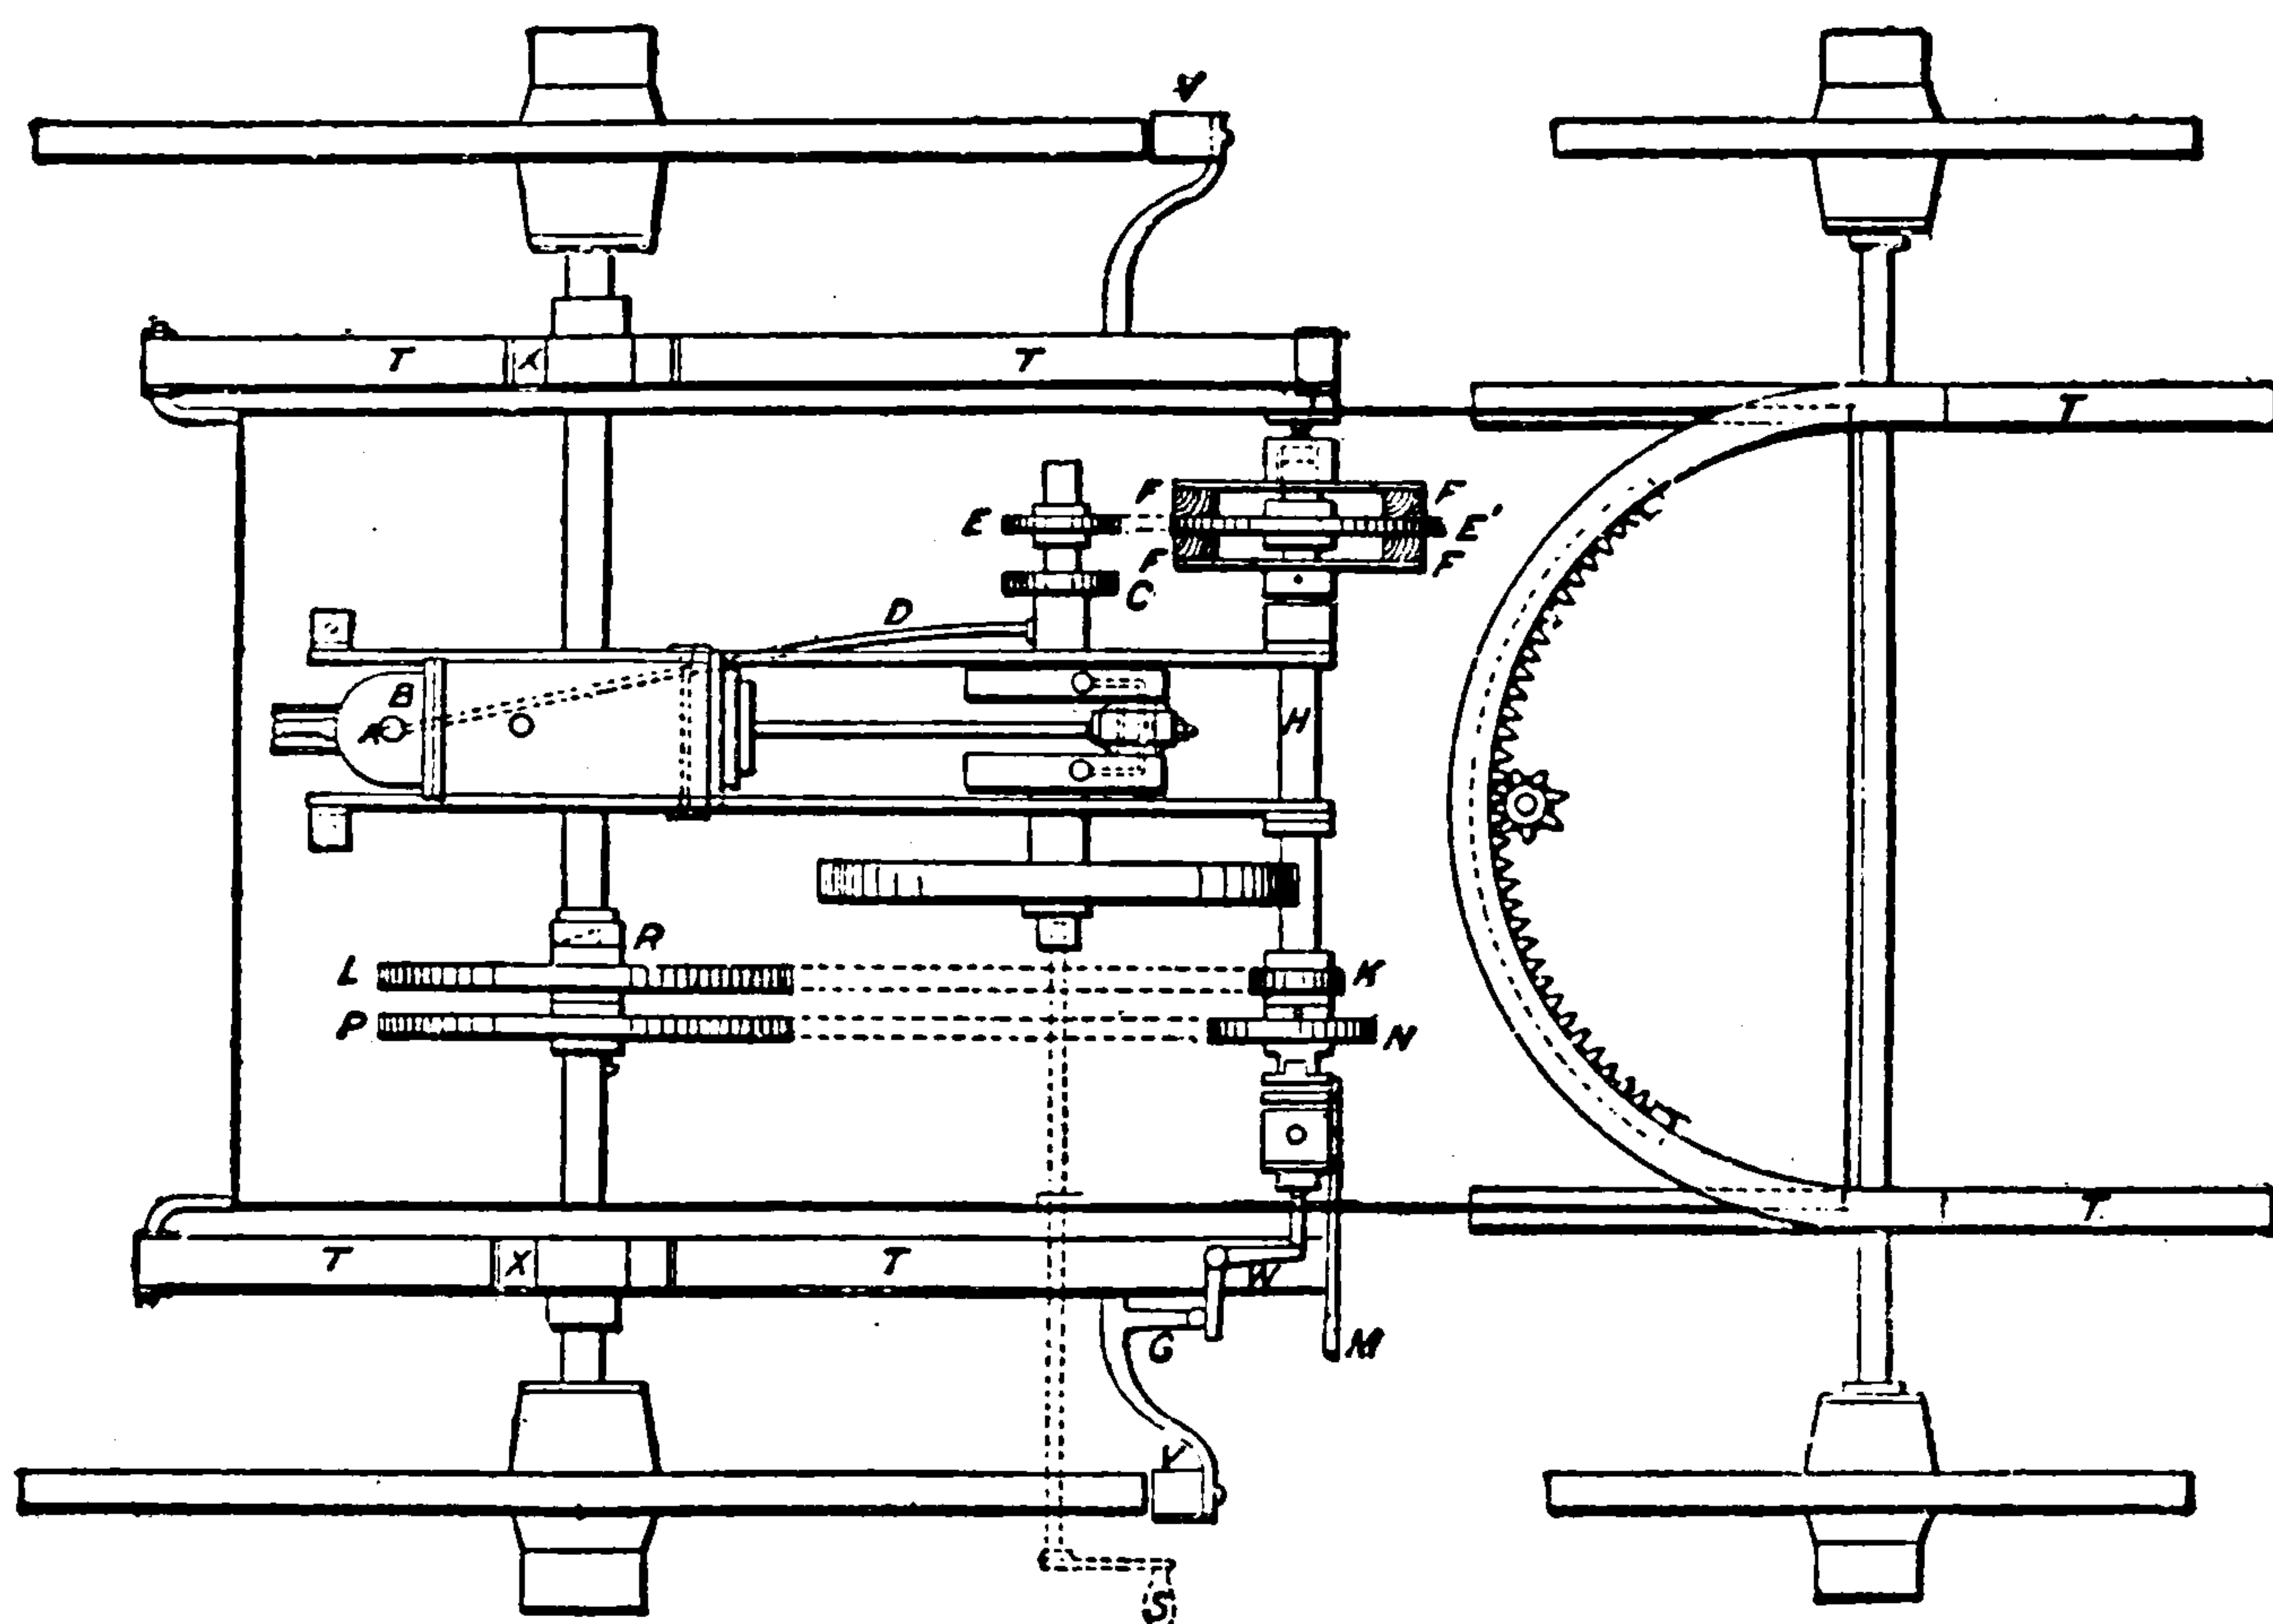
PLAN OF THE PETTER MOTOR CARRIAGE.
